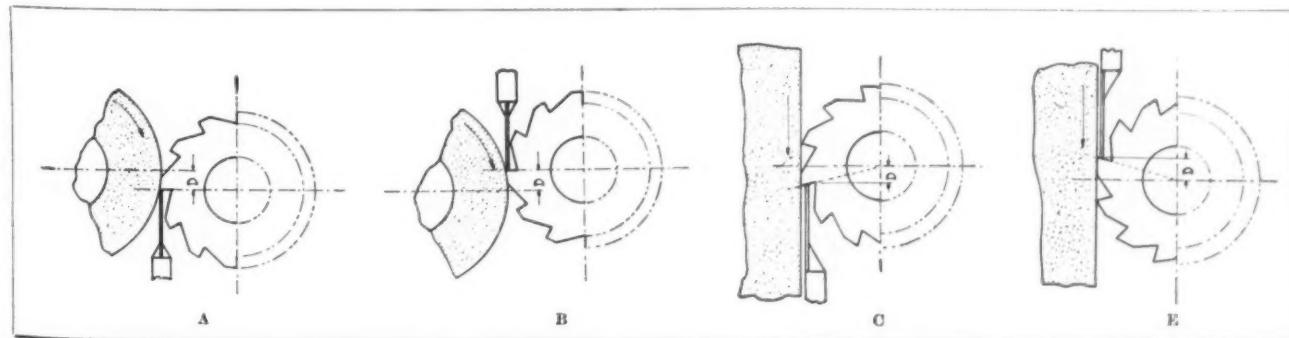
The Setting of Tooth-rests for the Grinding of Milling Cutters
